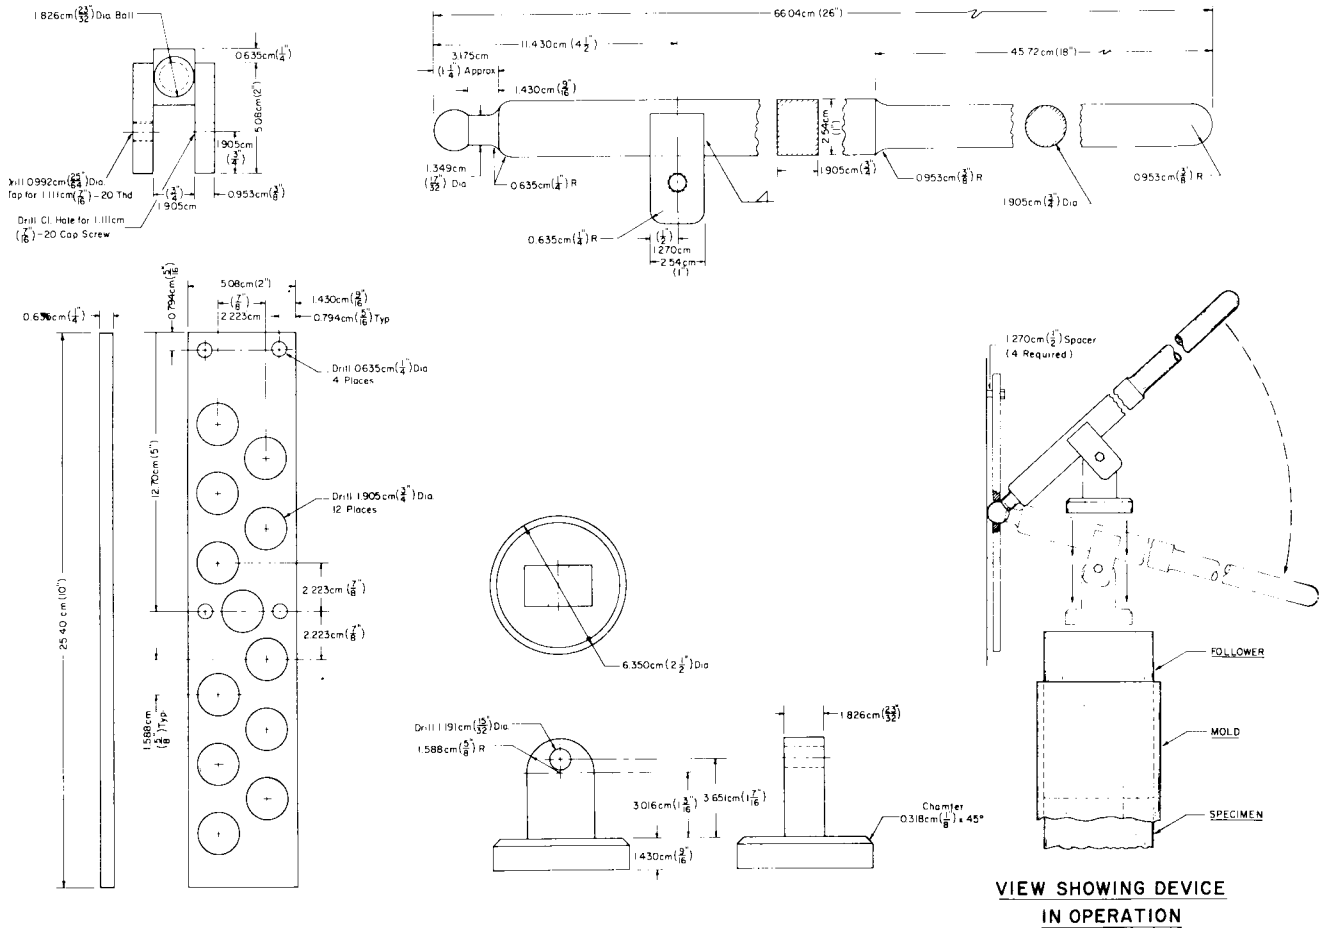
Detailed Drawings of the Test Specimen Push-Out Device
